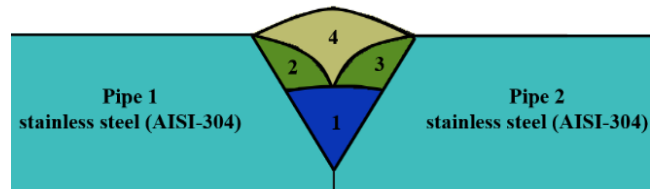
Vicinity of the multi-pass welding in a butt joint.
